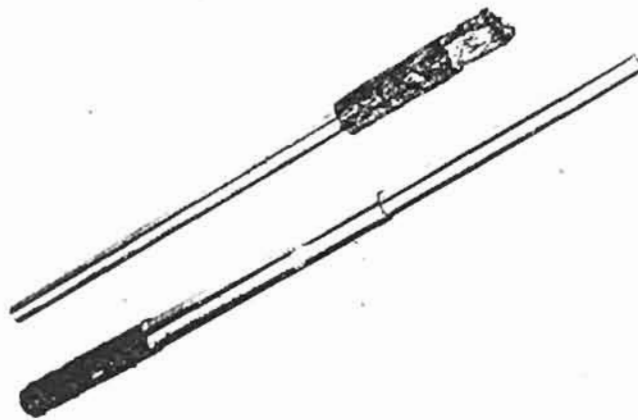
Machined surface of the semi-solid and semi-liquid extrusions, Shows that cracks are not deep.
